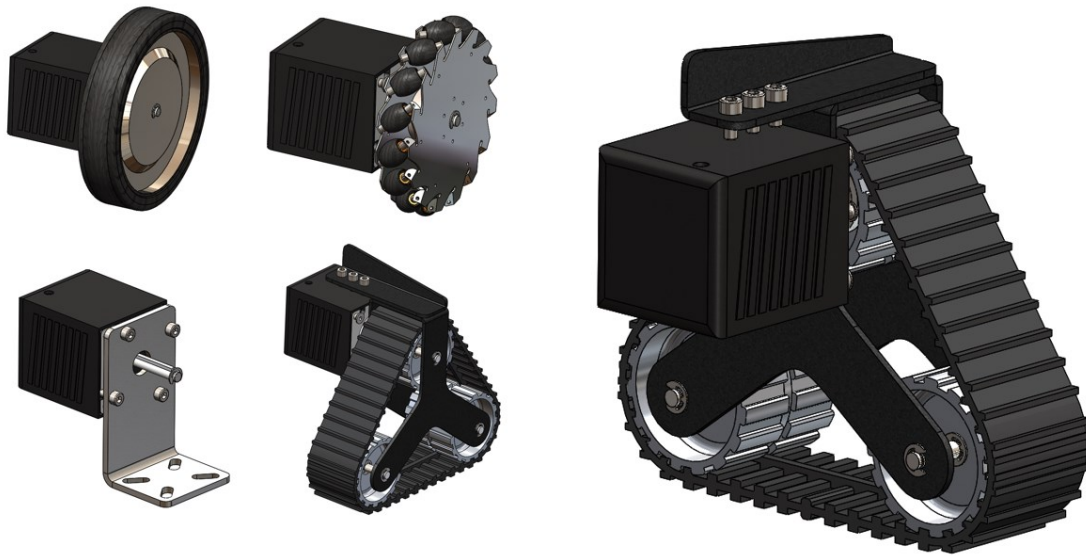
Normal wheel, mecanum wheel, stationary base and tracked wheel mounted on the stepper motor.
